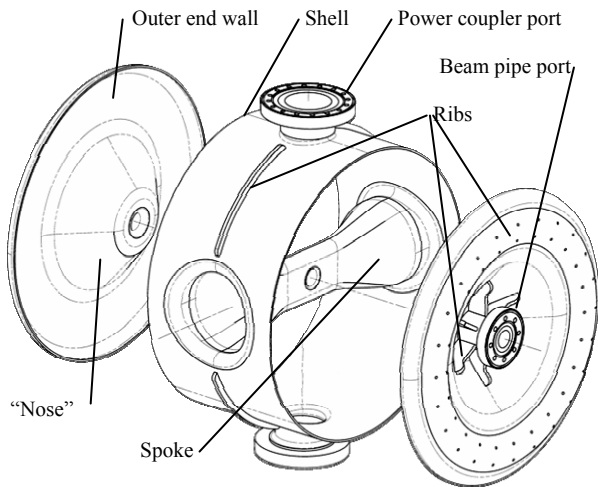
Exploded view of SSR1. For scale, the diameter of the Shell is 500 mm.
